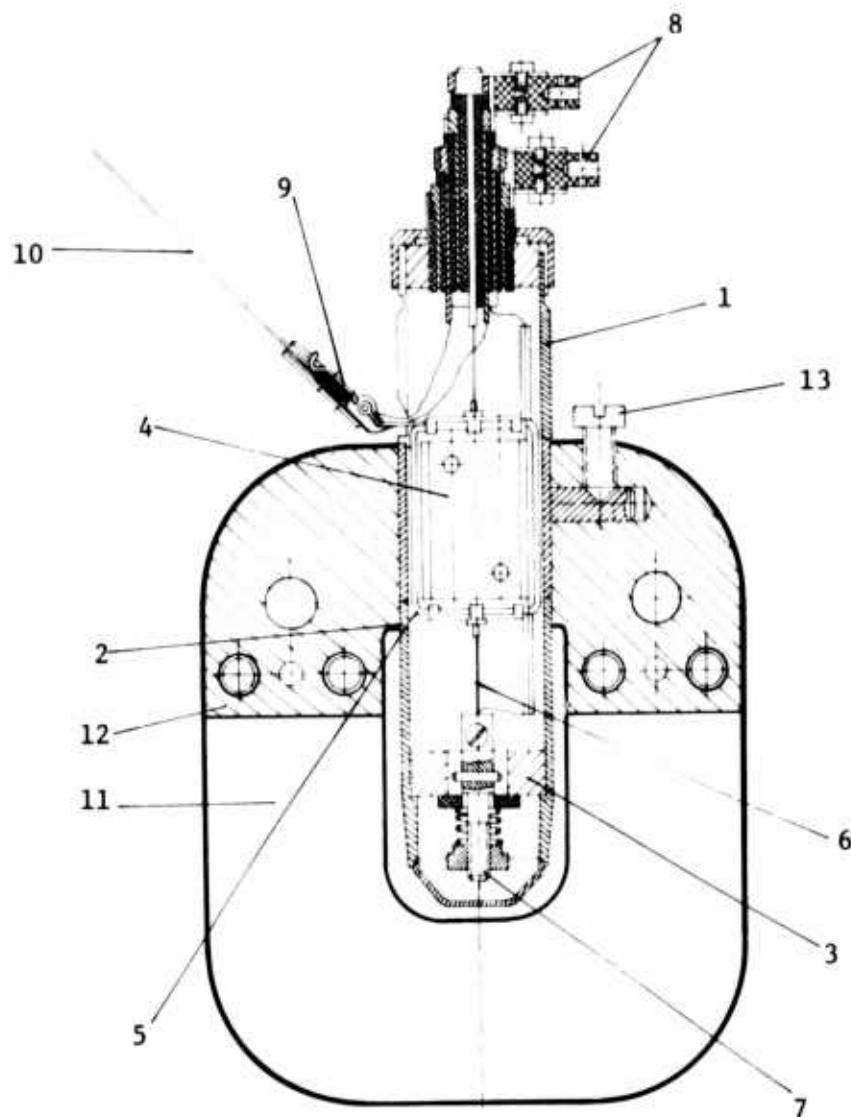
Schematic drawing of the GPT-II galvanometer pen [20]
